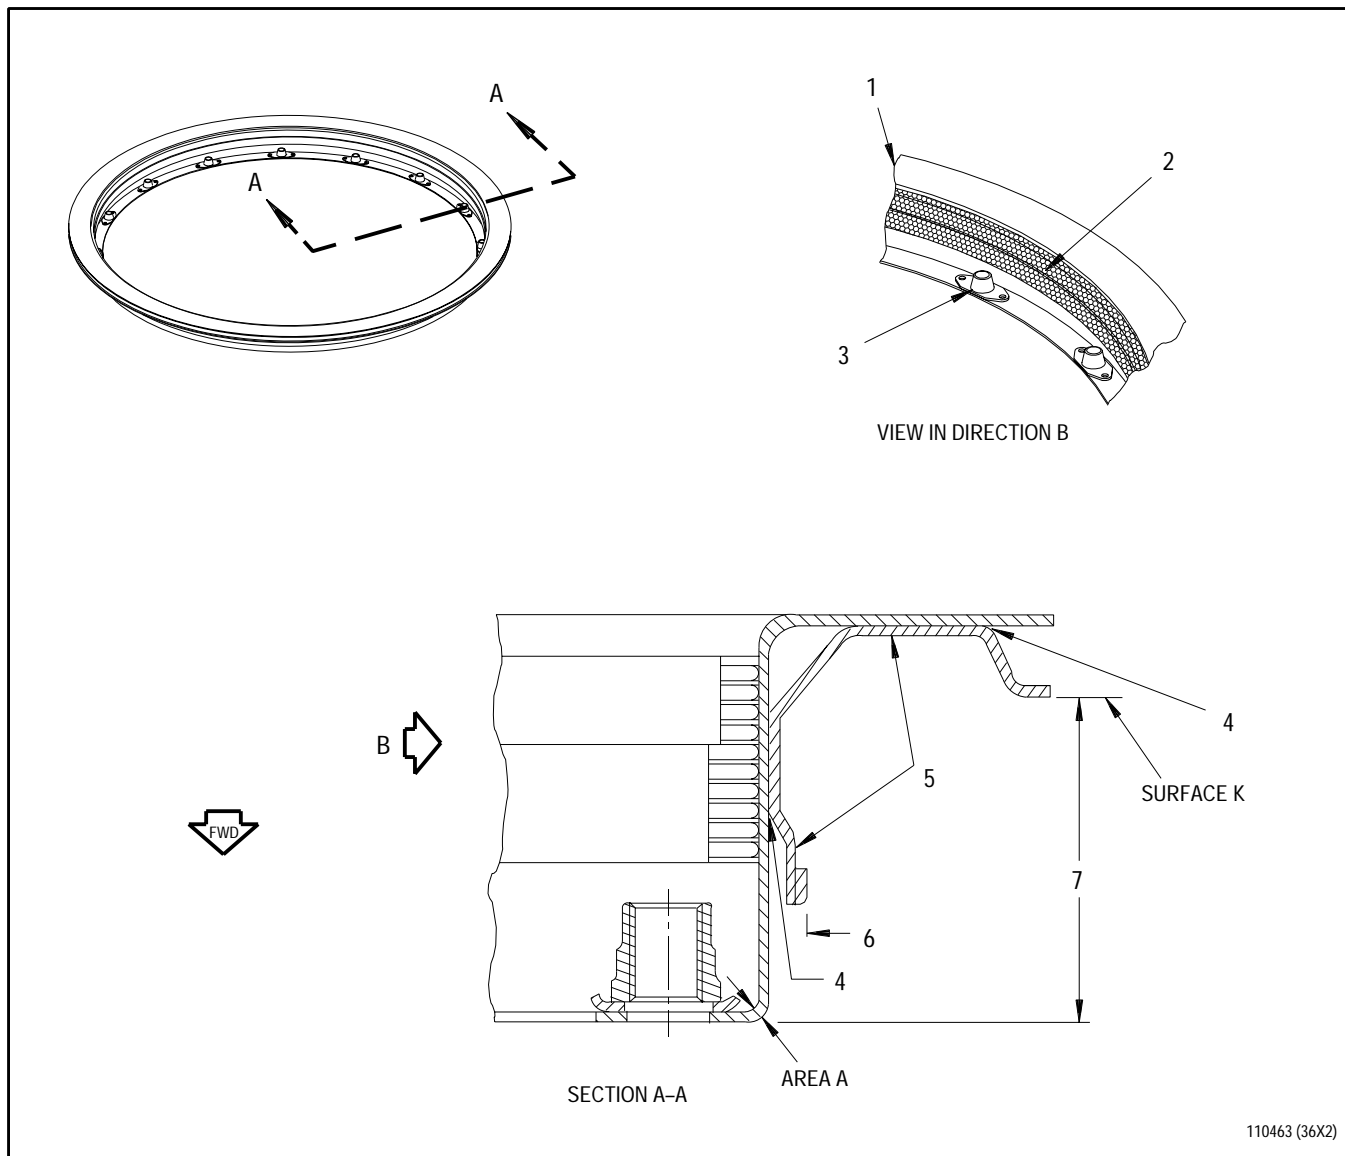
First Stage Turbine Outer Air Sealing Ring - Inspection
